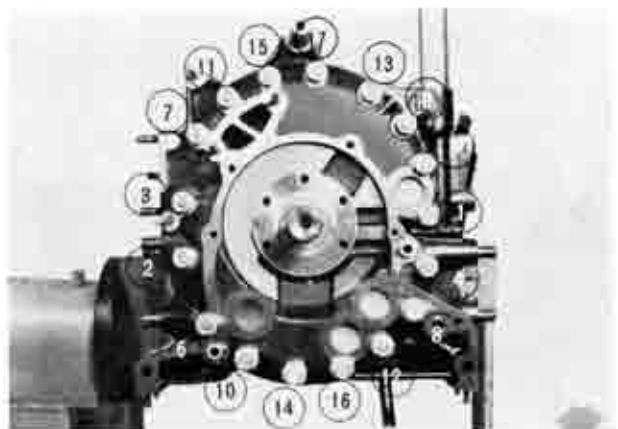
Installing front housing1-D-10. Tightening the Tension Bolts
